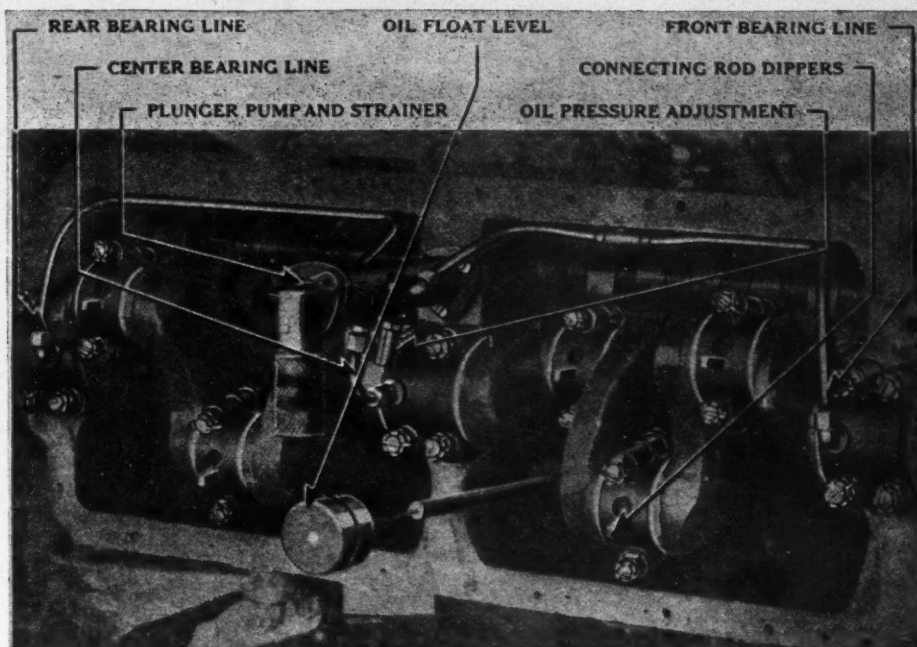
An underview of the Paige Detroit Continental engine showing the oil pressure adjustment
